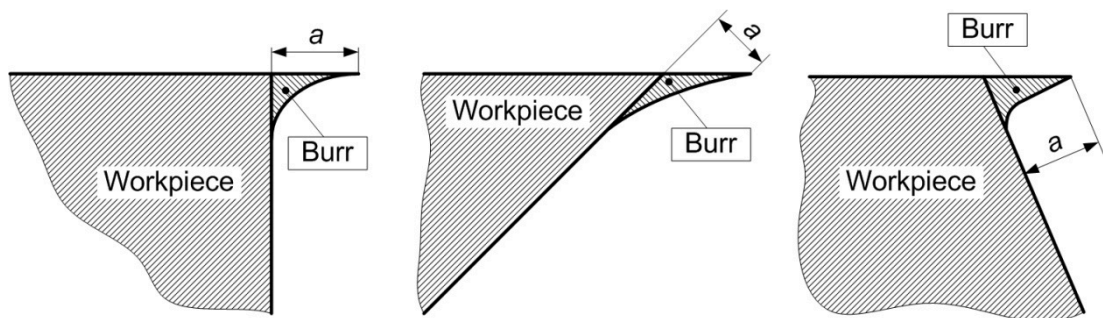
Burr geometry definition by DIN 6784 [110]
